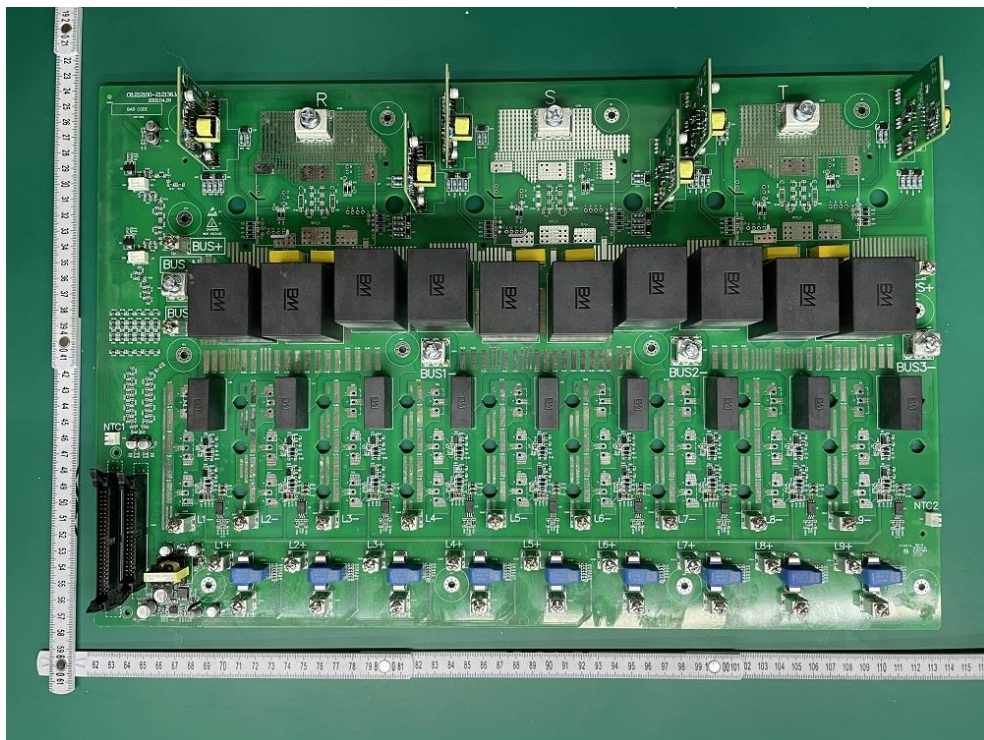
Front view of Main power board for C6-50K-T6-LV-40, C6-60K-T9-LV-40
